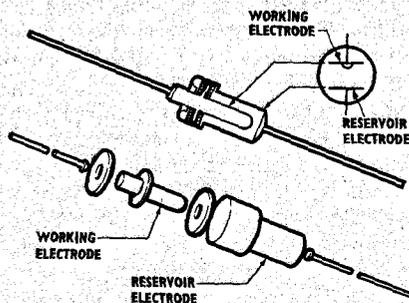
Cross-sectional and exploded view of the 'E' Cell device, together with its electrical symbol.
